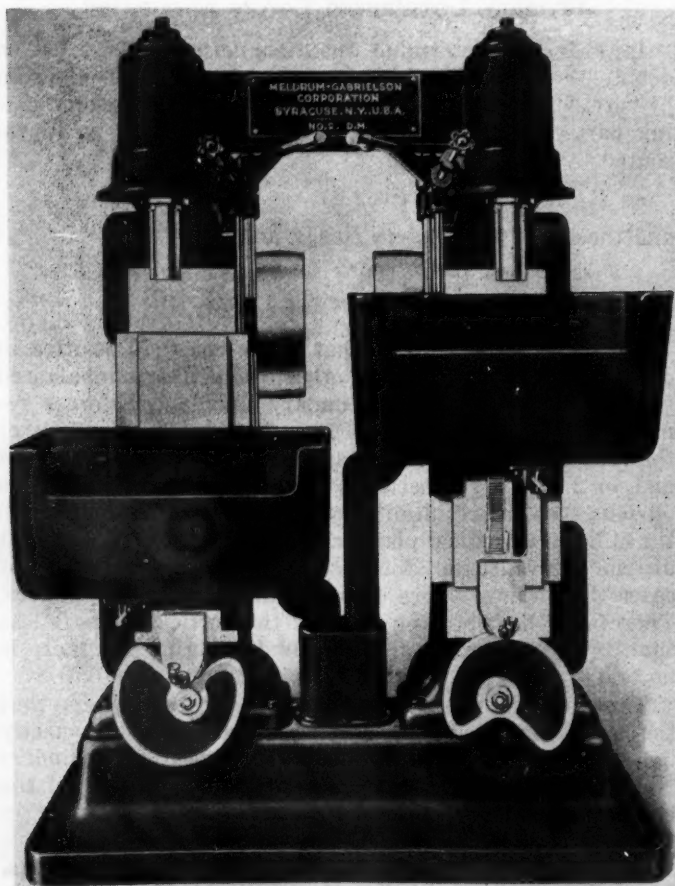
Front view of Production Unit showing feed cams at bottom and high splash pans on work table. Spindle is fitted with standard taper shank extension
